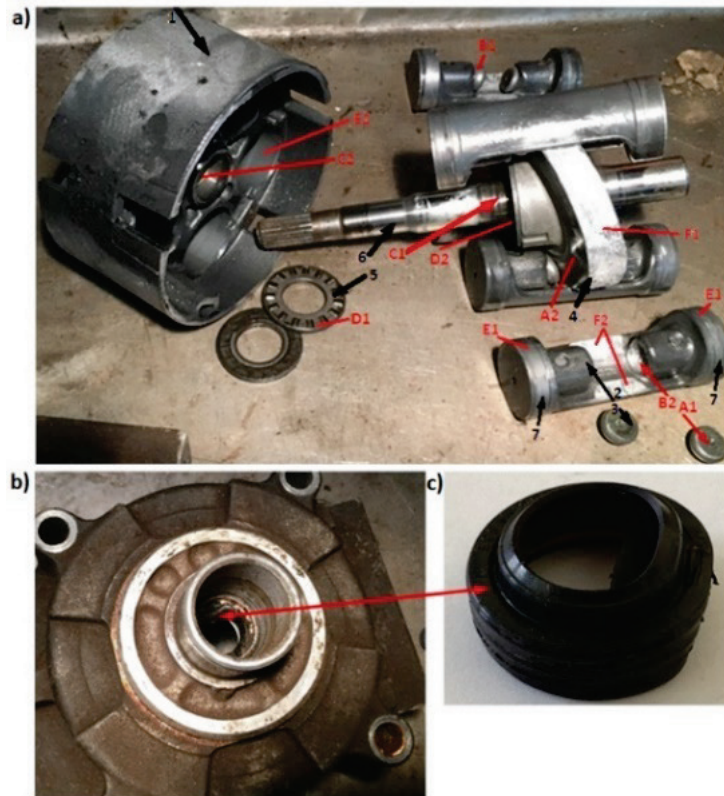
a) Components of the axial compressor of cooling aggregate, b) compressor housing part, c) damaged seal ring, 1 – head component, 2 – piston, 3 – tappet, 4 - the spatial disc cam, 5 - needle roller bearing, 6 –rotating shaft, needle roller bearing, 7-lubricating rings
